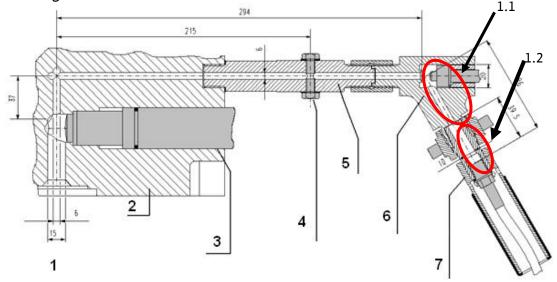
The SULZER diesel engine type 6AL20/24 indicating channel (1- combustion chamber, 2-cylinder head, 3-starting valve channel, 4- screws added to chocking/throttling gas stream during the experiment tests, 5-union piece, 6- indicating valve, 7- Thompson adapter with pressure sensor)
